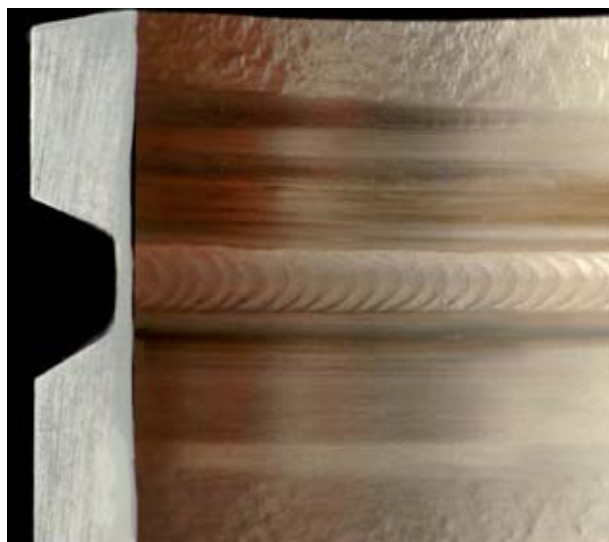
16-8-2 Inside view of weld root on TP 316 Cb
